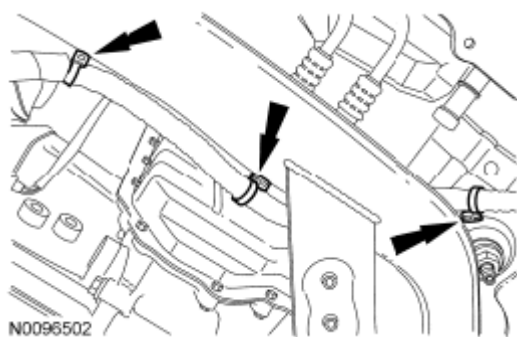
Locating Wiring Harness Retainers To Front Of Subframe LH
